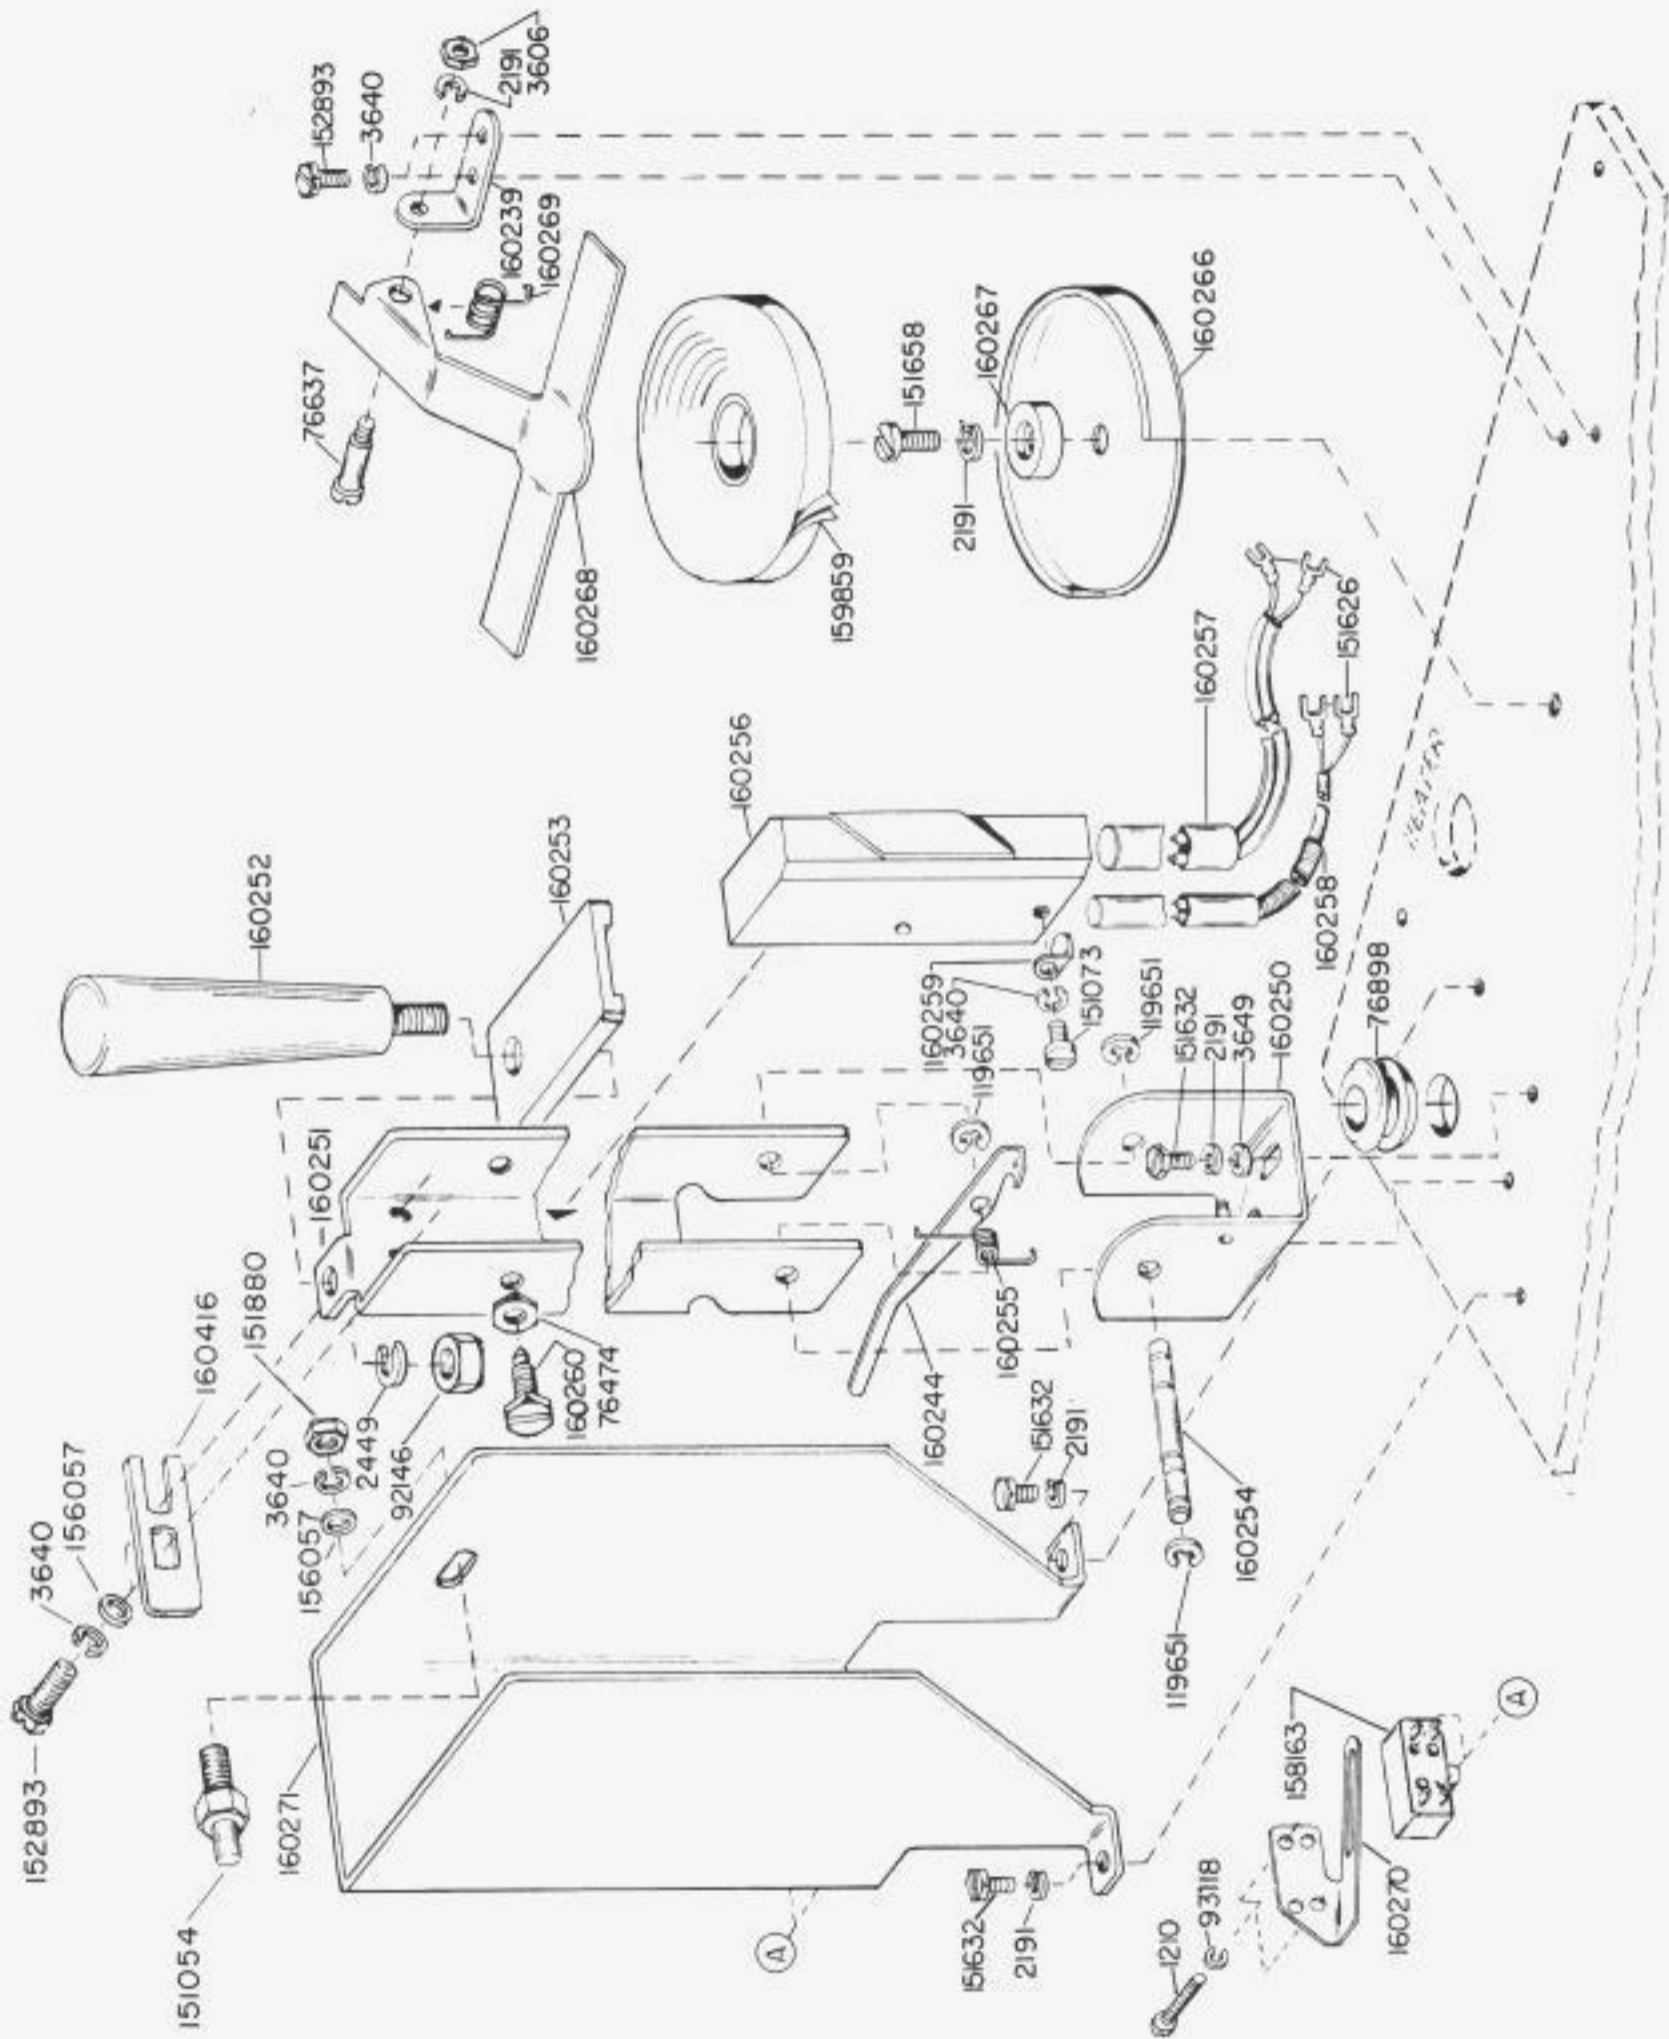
HEATER MECHANISM AND TAPE RETAINER
